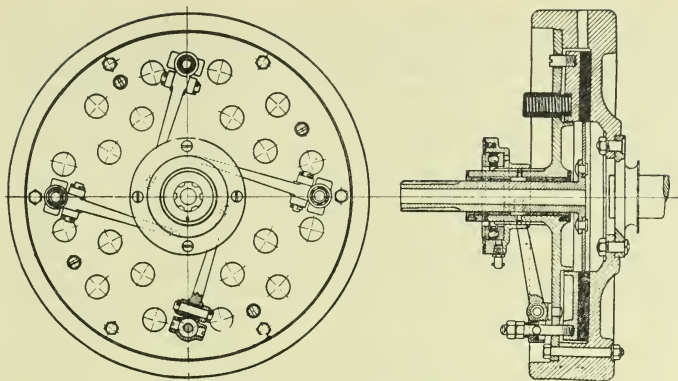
SECTION THROUGH THE CLUTCH USED ON THE TYPES-J AND L BUSES
